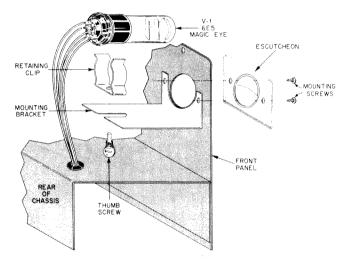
HOW TO MOUNT THE MAGIC EYE BRACKET
